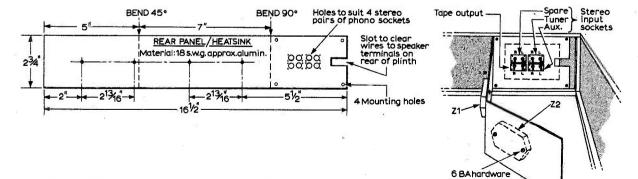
Cutting out and mounting details of rear panel/heatsink. 994
